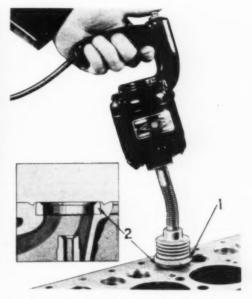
SPECIAL TOOL (1) grinds hard valve seat inserts used in exhaust valve ports. It is impossible to recut these inserts. Grinding stone must be trued for concentricity on diamond pressing tool and must be operated dry to maintain proper grinding speed.
